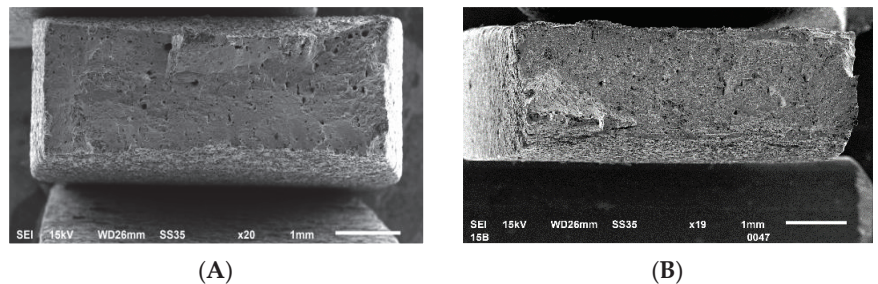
Fracture images of samples’ subjected to tensile testing: (A)—PAGA; (B)—UA.
